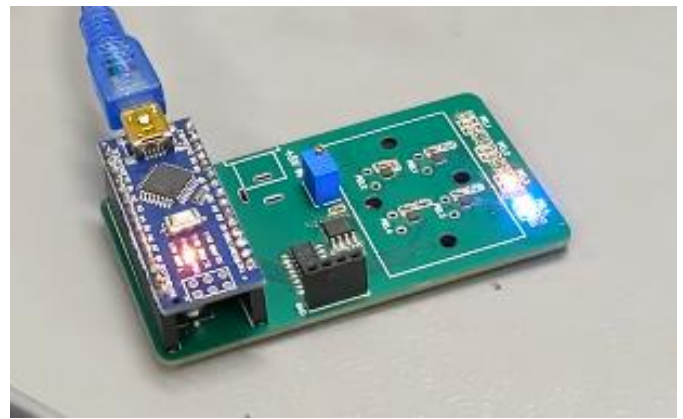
Fully assembled PCB. The PCB is connected to the computer via a USB cable. In this picture, the LEDs array state that the PCB is signalled to close valve number 3 (red light), and open valve number 4 (blue light).
